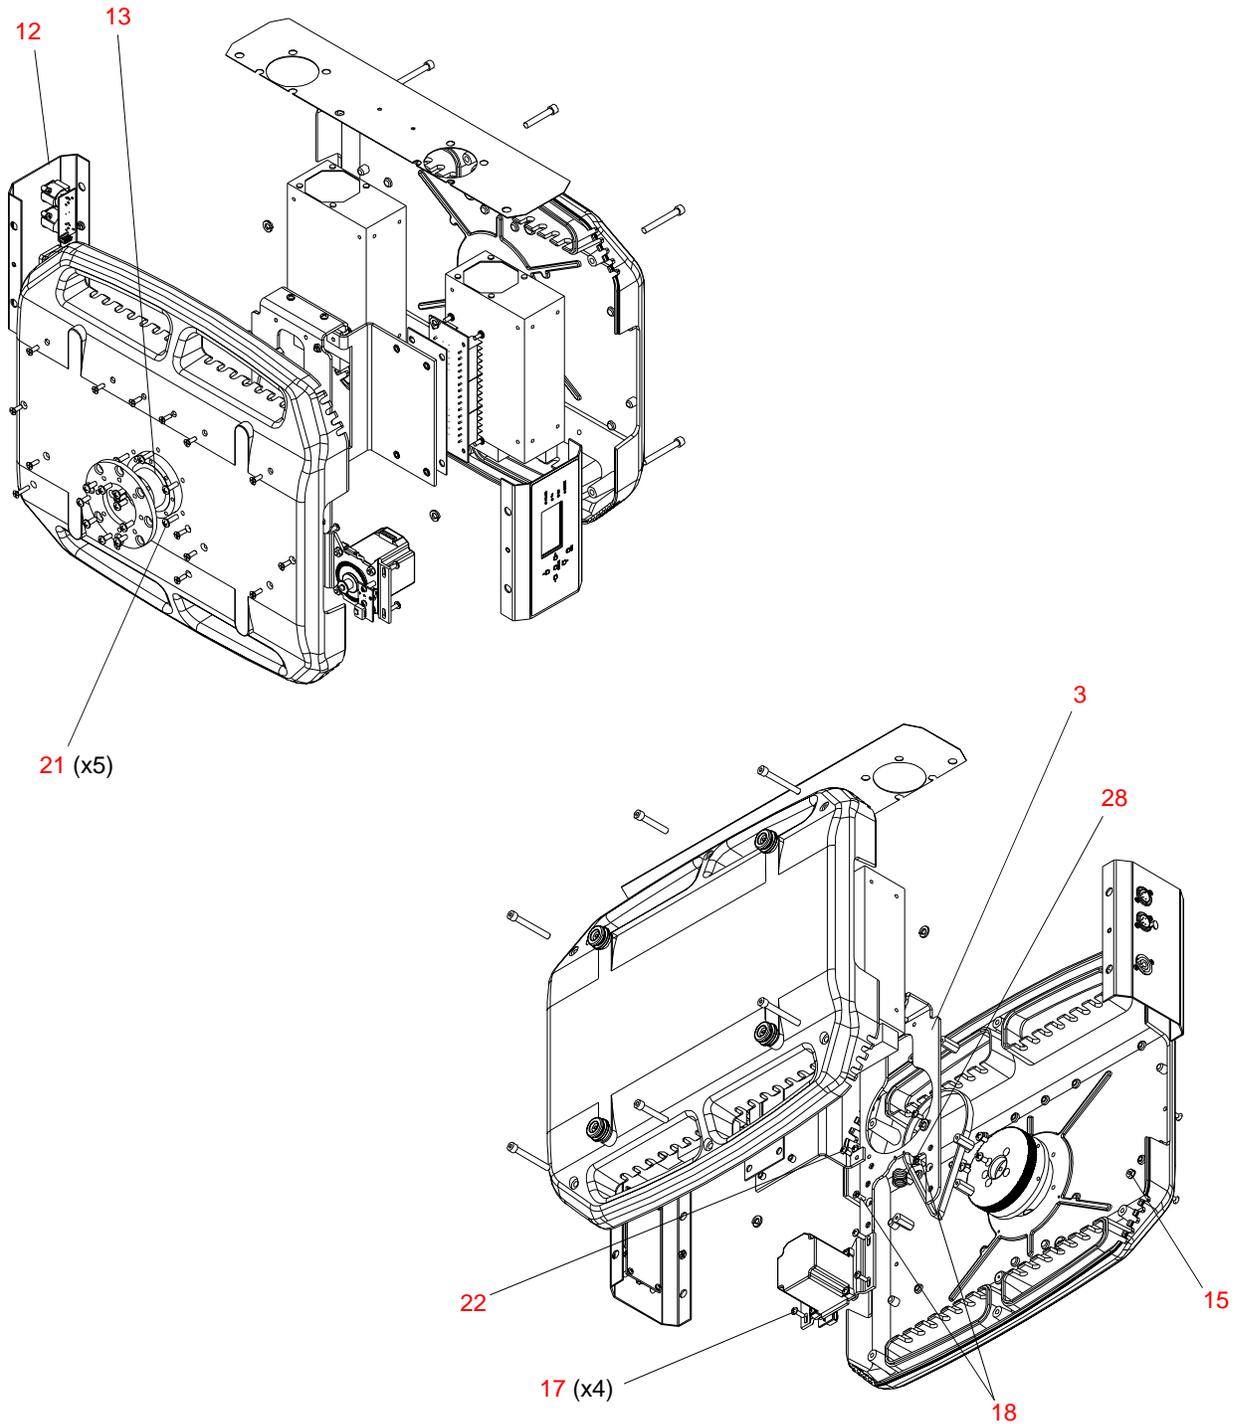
VLX Wash Upper Enclosure Assembly Part 2
